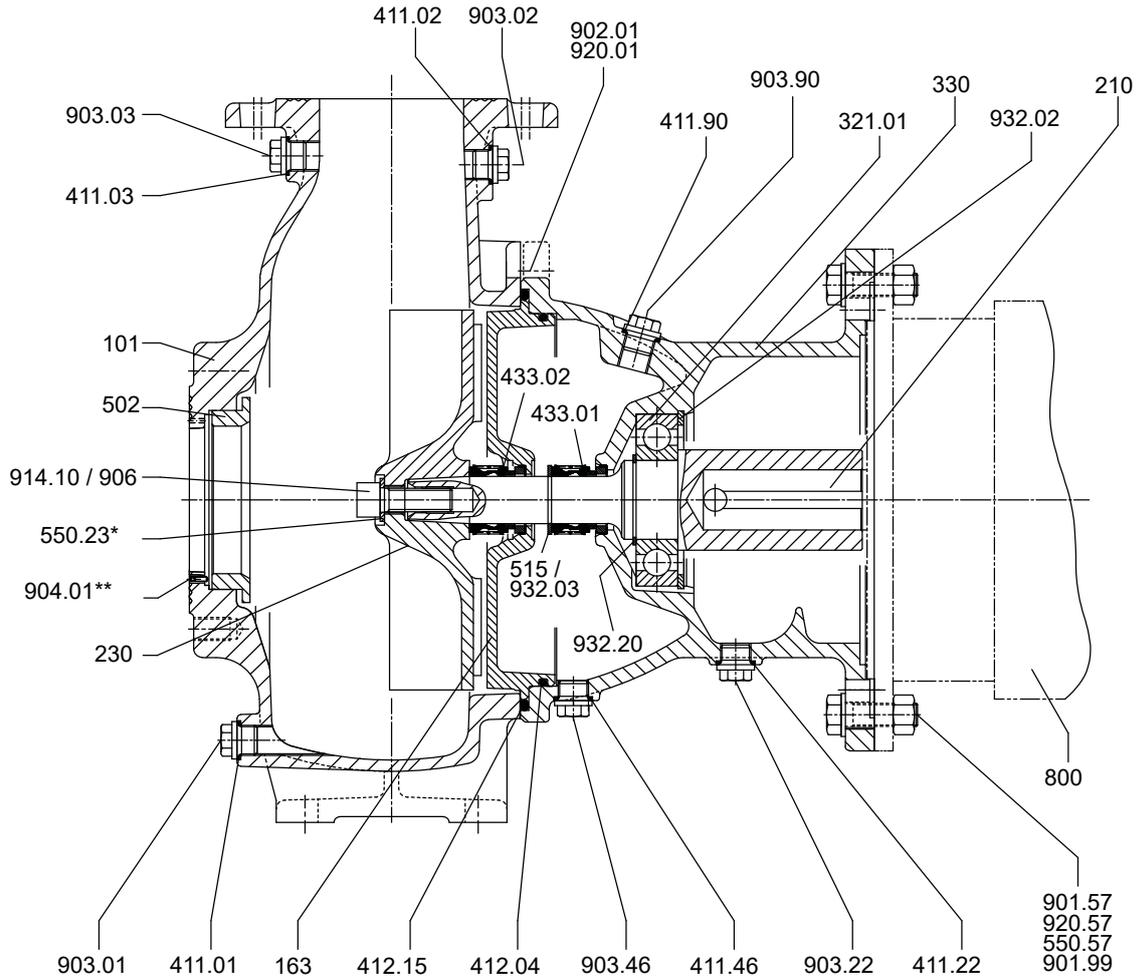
General assembly drawing of Sewabloc; * if any,  only for sizes 100-253, 100-254, K 100-316
